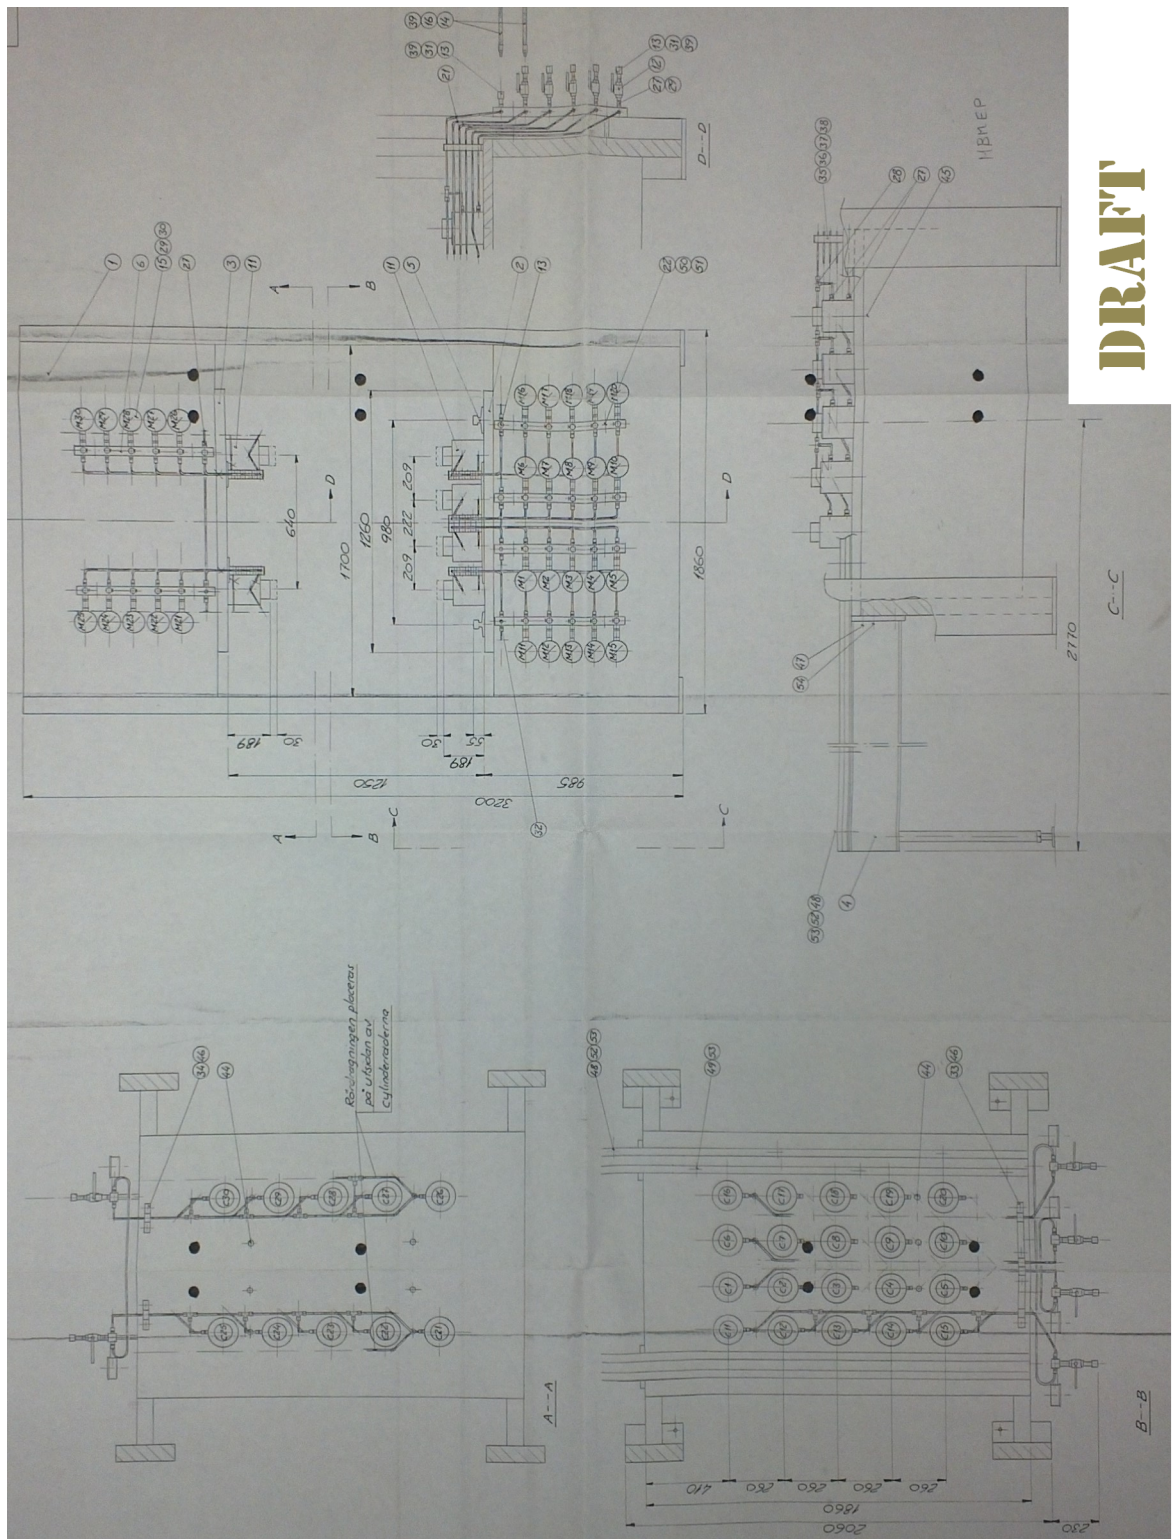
Obsolete dimensions of the unmodified design: The hydraulic cylinder configuration of the press.
